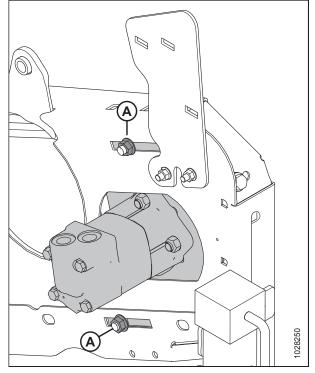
Knife Drive Motor– Double-Knife Header, View from Rear
